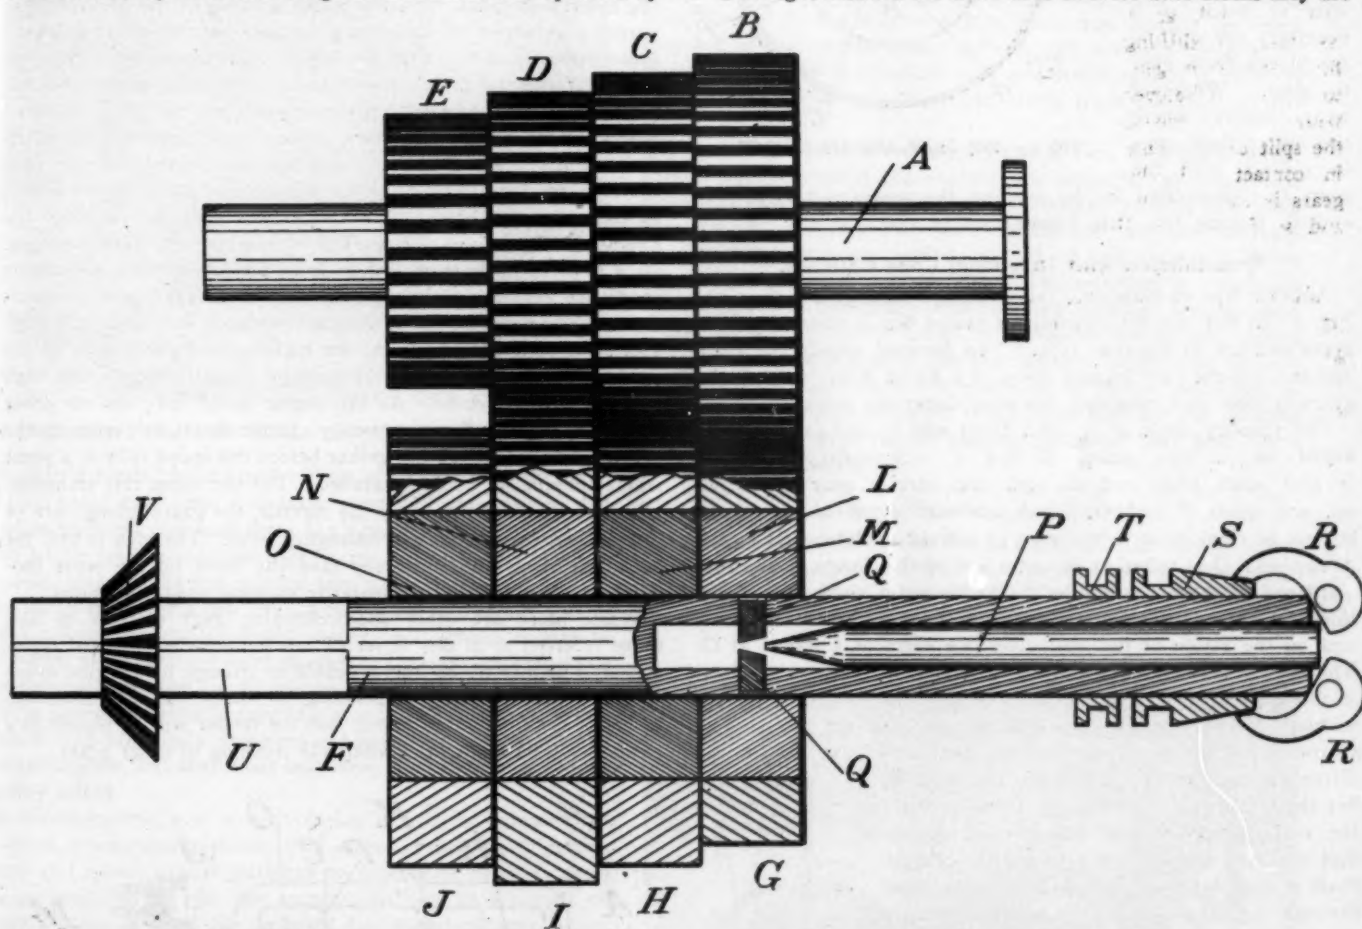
CHANGE-SPEED GEAR WITH INDIVIDUAL CLUTCHES ENCLOSED IN THE DRIVEN GEARS.
